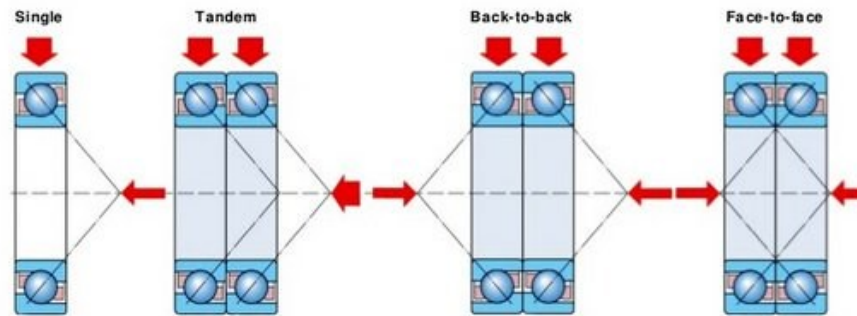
Arrangements of Angular Contact Ball Bearings [104]
